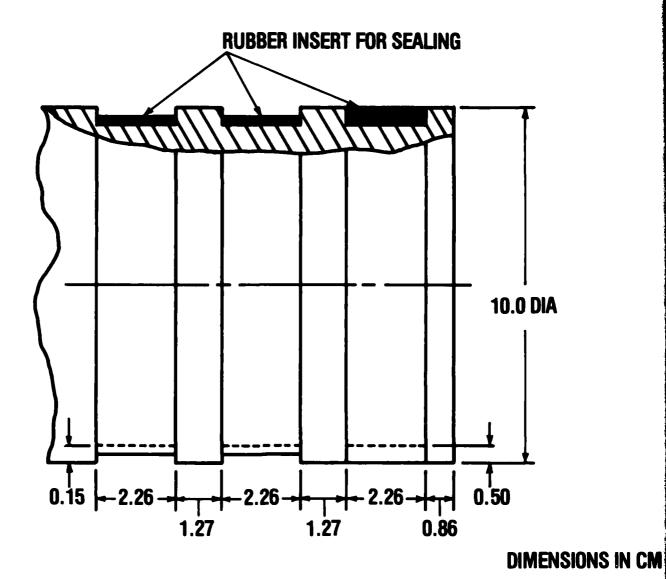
SKETCH OF BULKHEAD-FABRIC ATTACHMENT
